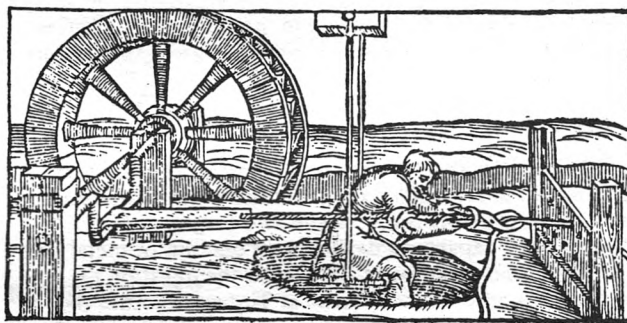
Water-powered machine for drawing iron wire, as shown by Biringuccio in 1540.
